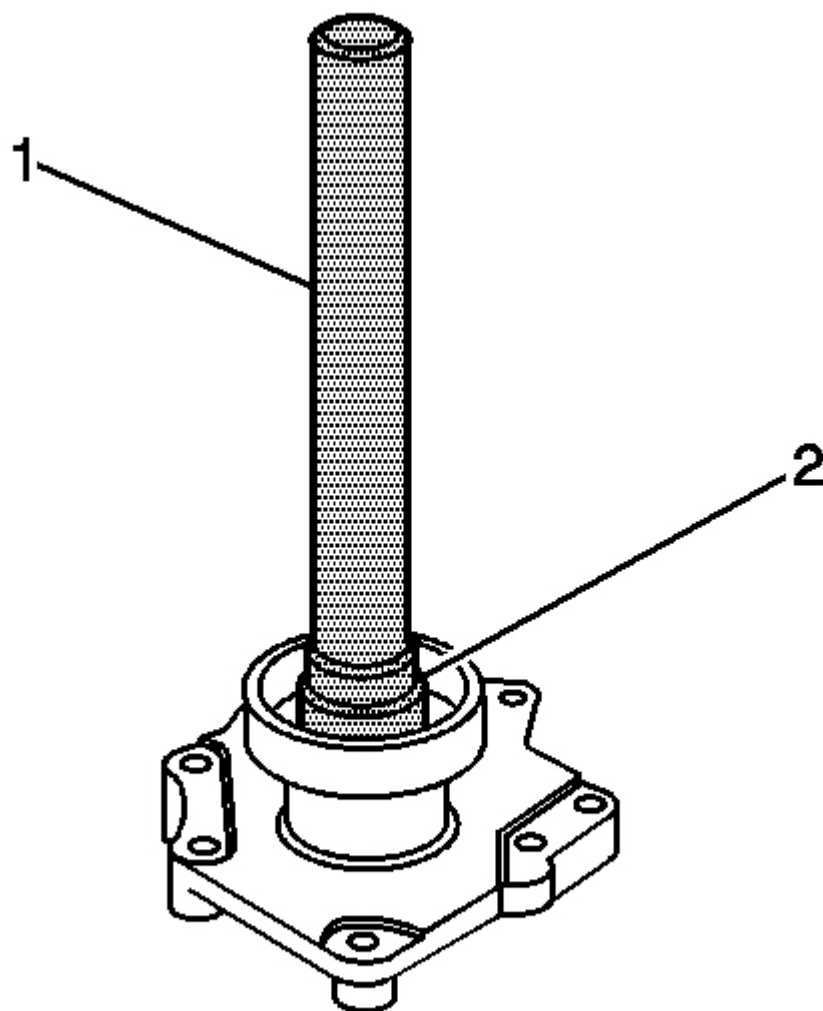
Identifying Universal Driver Handle & Differential Bearing Adjuster Needle Bearing Replacer - LH (Inner Axle Bearing)
